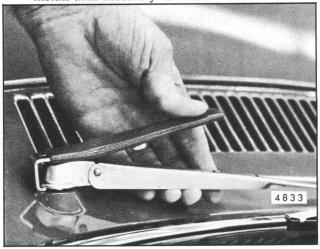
Wiper Arm Removal Tool J-8966 (Or Equivalent)
